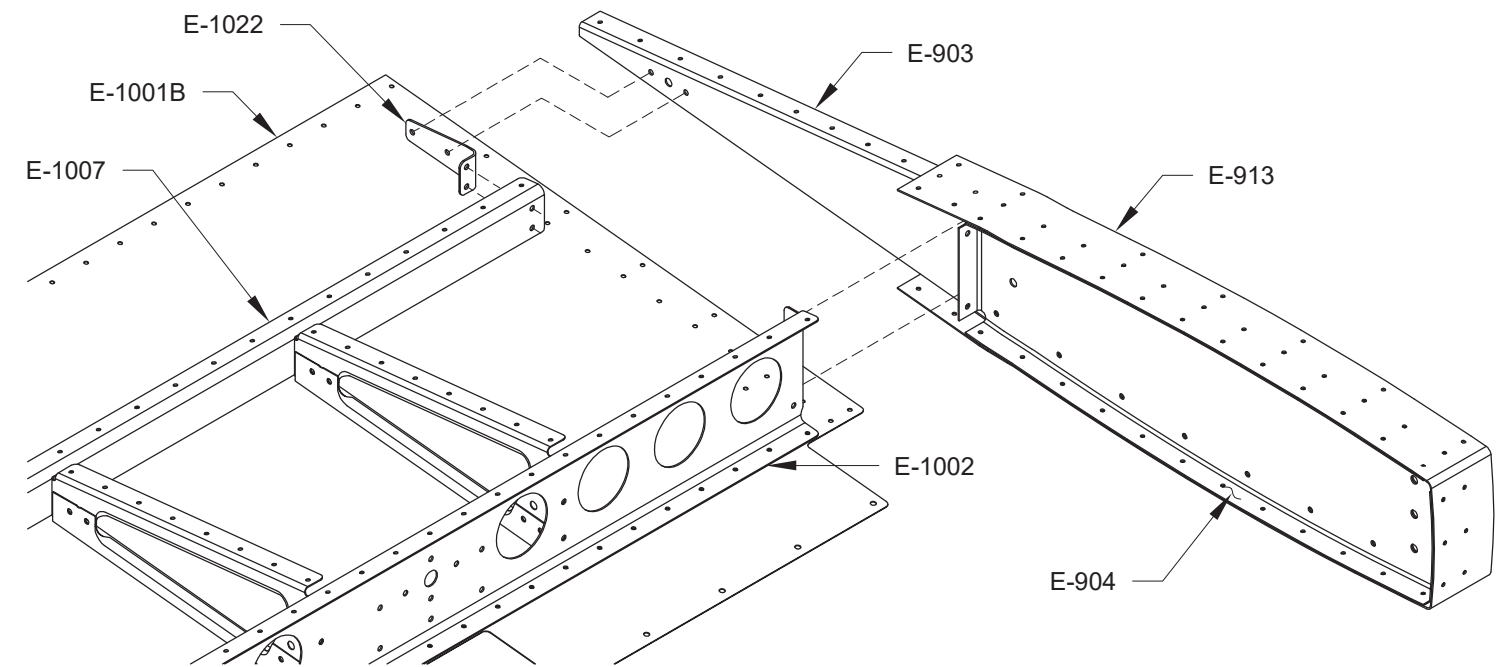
CLECOING THE TIP RIB ASSEMBLY
